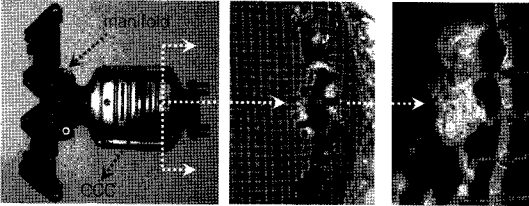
The shape of thermally damaged CCC which caused vehicle fire.
